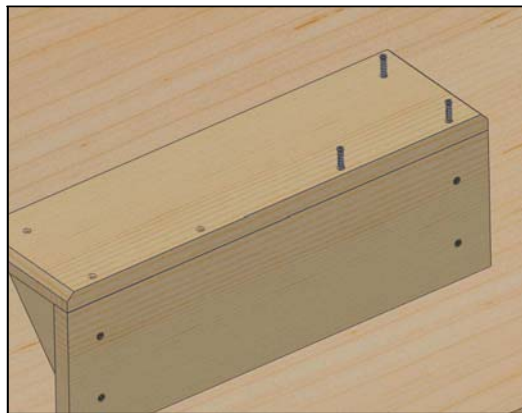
Hold the top piece tight against the bottom assembly to mark pilot holes.
